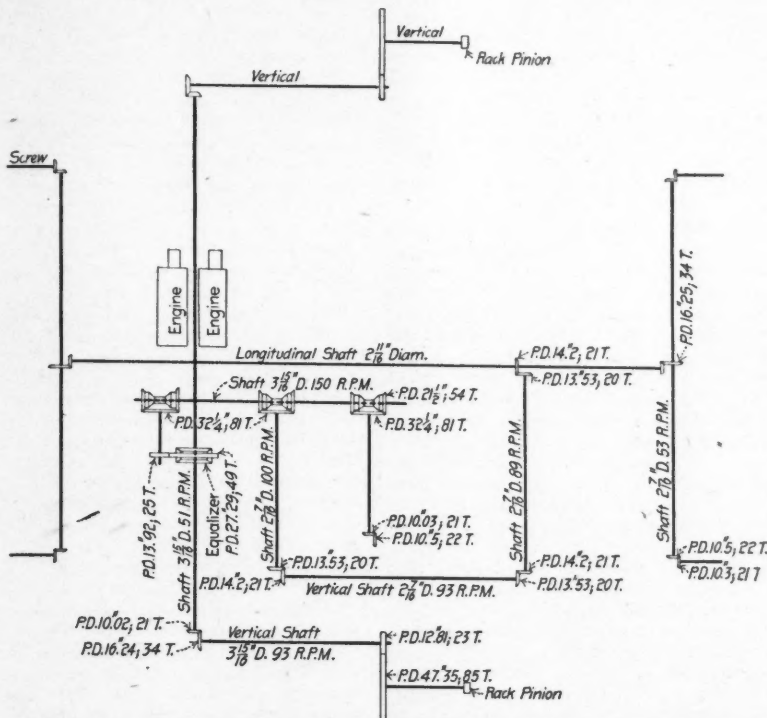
DIAGRAM SHOWING SIZES OF SHAFTING AND GEARING LEADING FROM ENGINE TO POINTS WHERE POWER IS USED.
